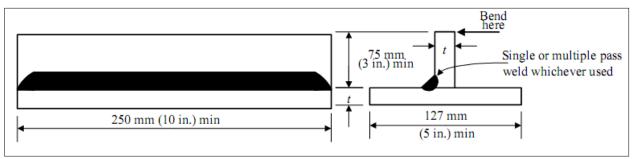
Test No. 3 - Fillet-weld Test
